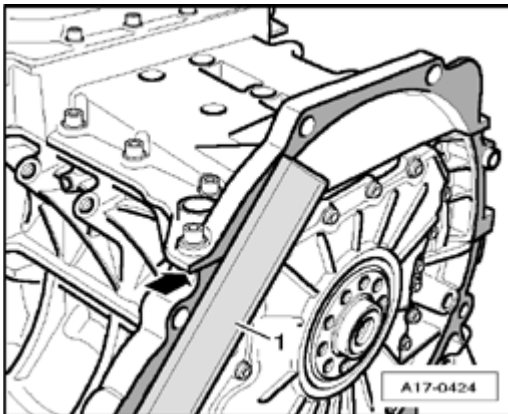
Identifying Contact Surfaces Of Cylinder Block And Oil Pan Upper Part Are Aligned To Transmission
